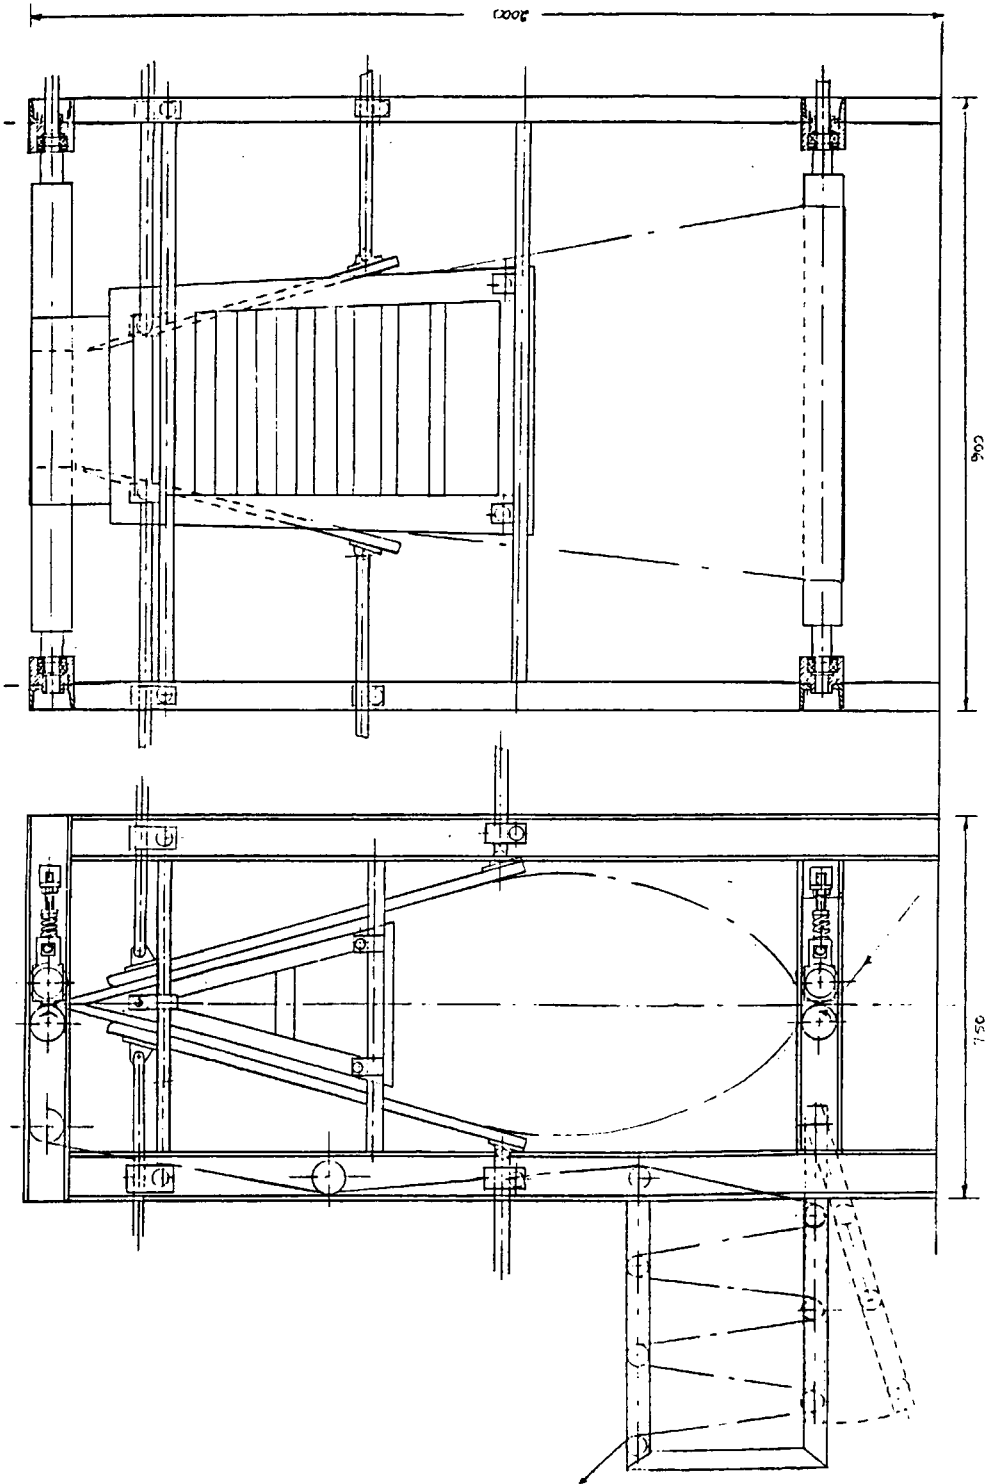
Gusset Unit for Polyethylene Bag Machine.
